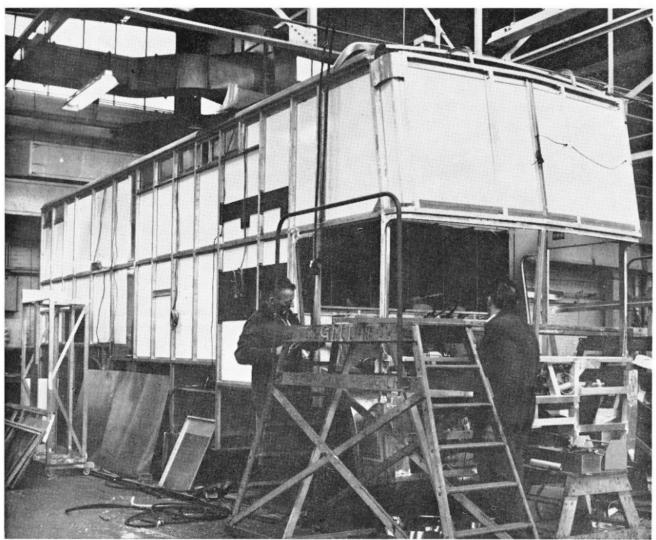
The vehicle under construction. Interior panelling and vehicle electrical wiring in place.
